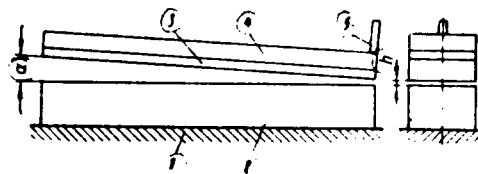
Arrangement of parts for explosion welding: 1 -- rigid base; 2 and 3 -- plates to be welded; 4 -- explosive charge; 5 -- detonator; α -- angle between plates; h -- least distance between plates.
